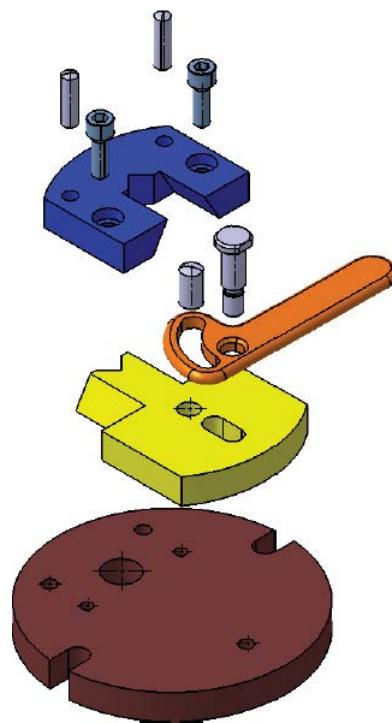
Exploded drawing of the product "Spannvorrichtung"
